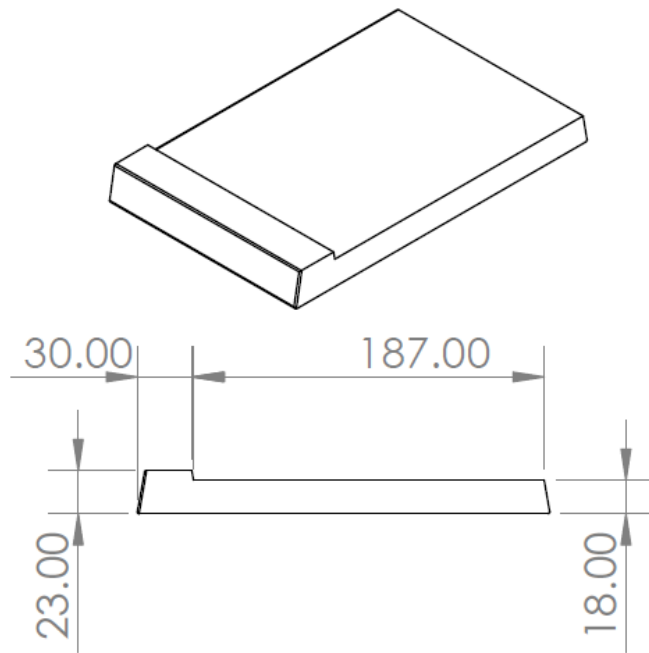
Slab geometry dimensions cast with a metal mould (in millimeters).
